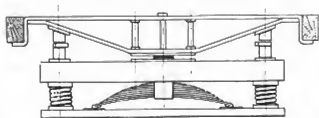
ARRANGEMENT OF BOLSTER SPRINGS FOR NARROW BOLSTER
